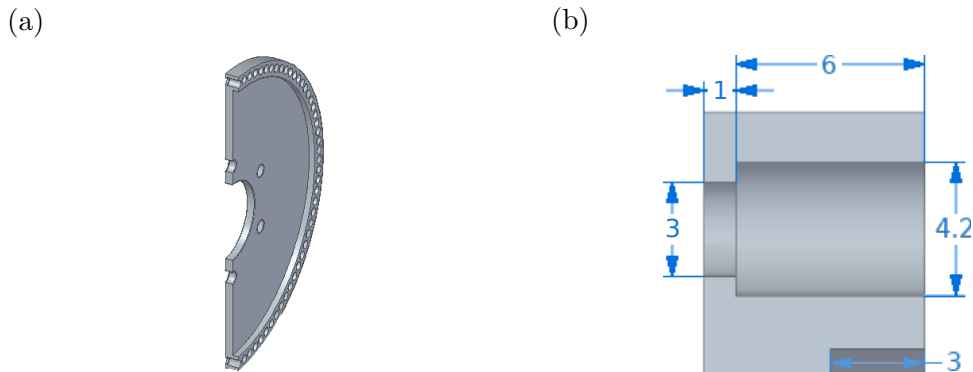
Cut through (a) of the magnet holder, as well as (b) a detailed view of the magnet holders. All given dimensions are in mm.
